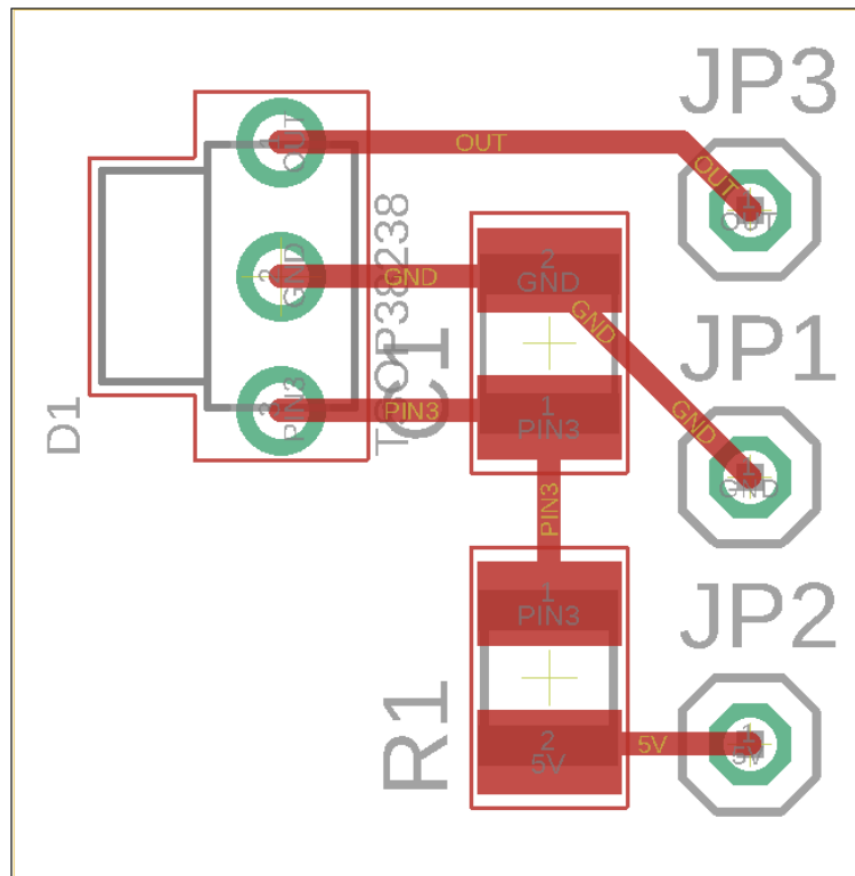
Final Step Sensor Receiver Circuit PCB
